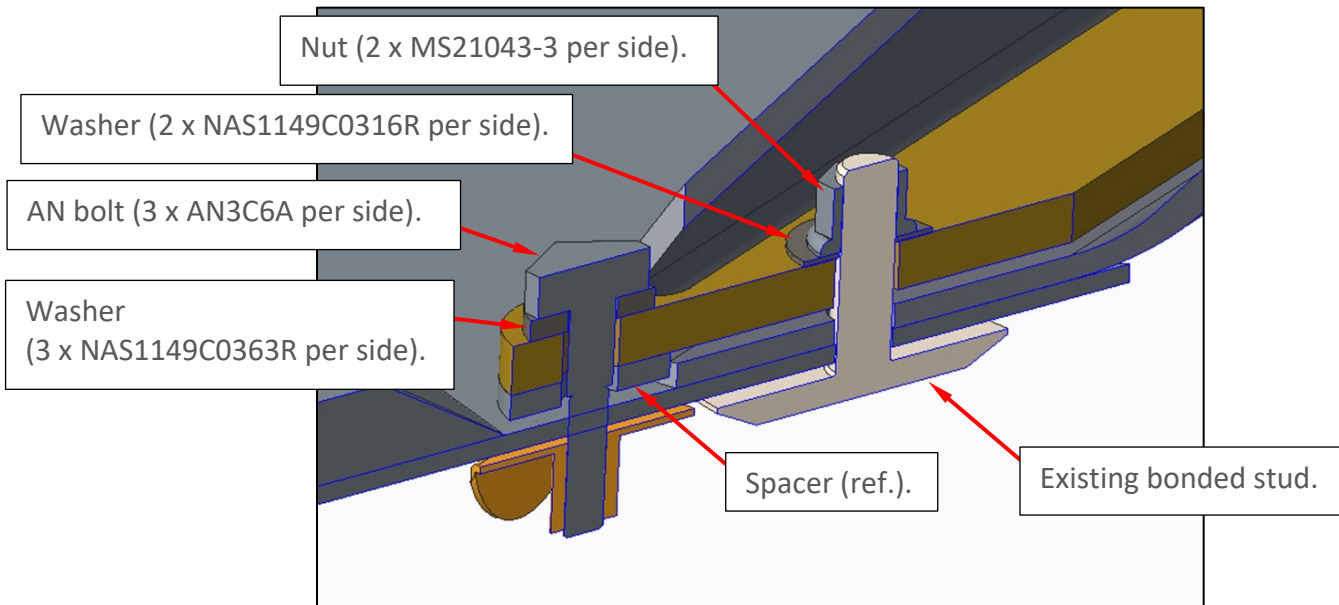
Fastener hardware stack (typical 3 fasteners per Pulley Bracket Reinforcement Strap).
